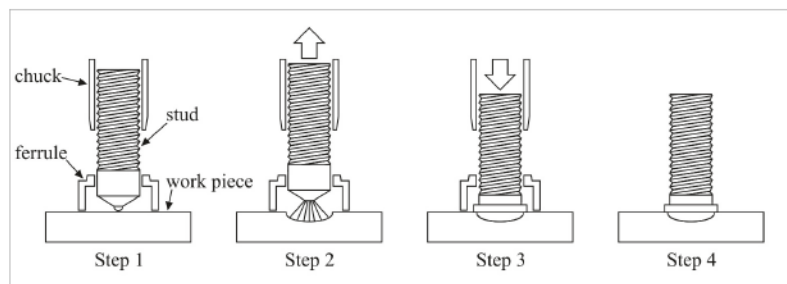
The four steps of a drawn-arc stud welding process
